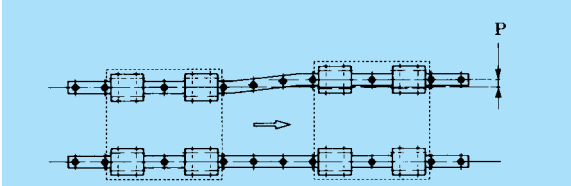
Tolerance for Parallelism Between Two Axes (P)
